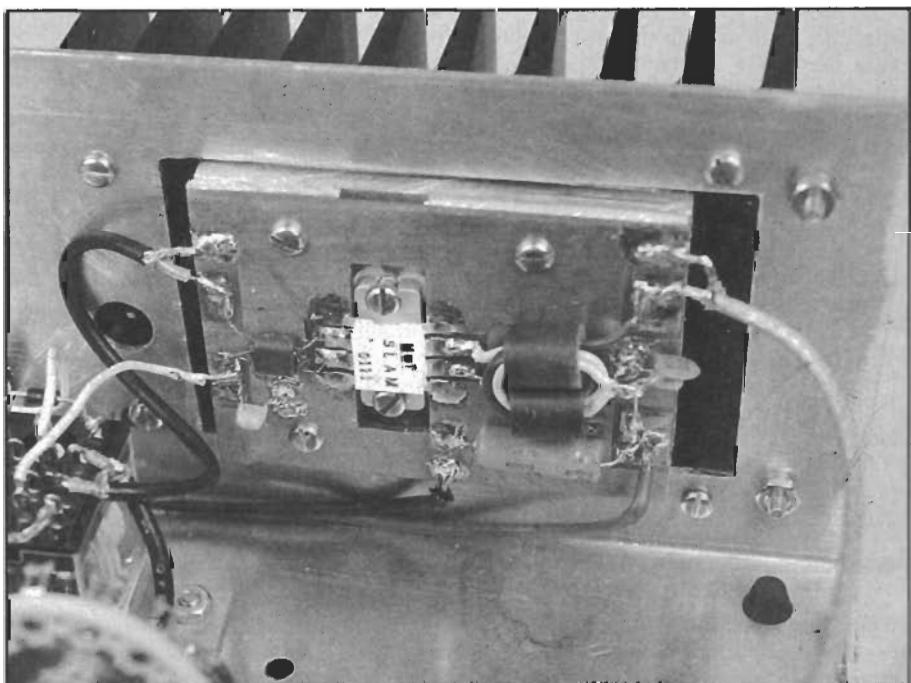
The assembled amplifier-module PC board in position and secured to the heat sink (see Fig 5, next page).
